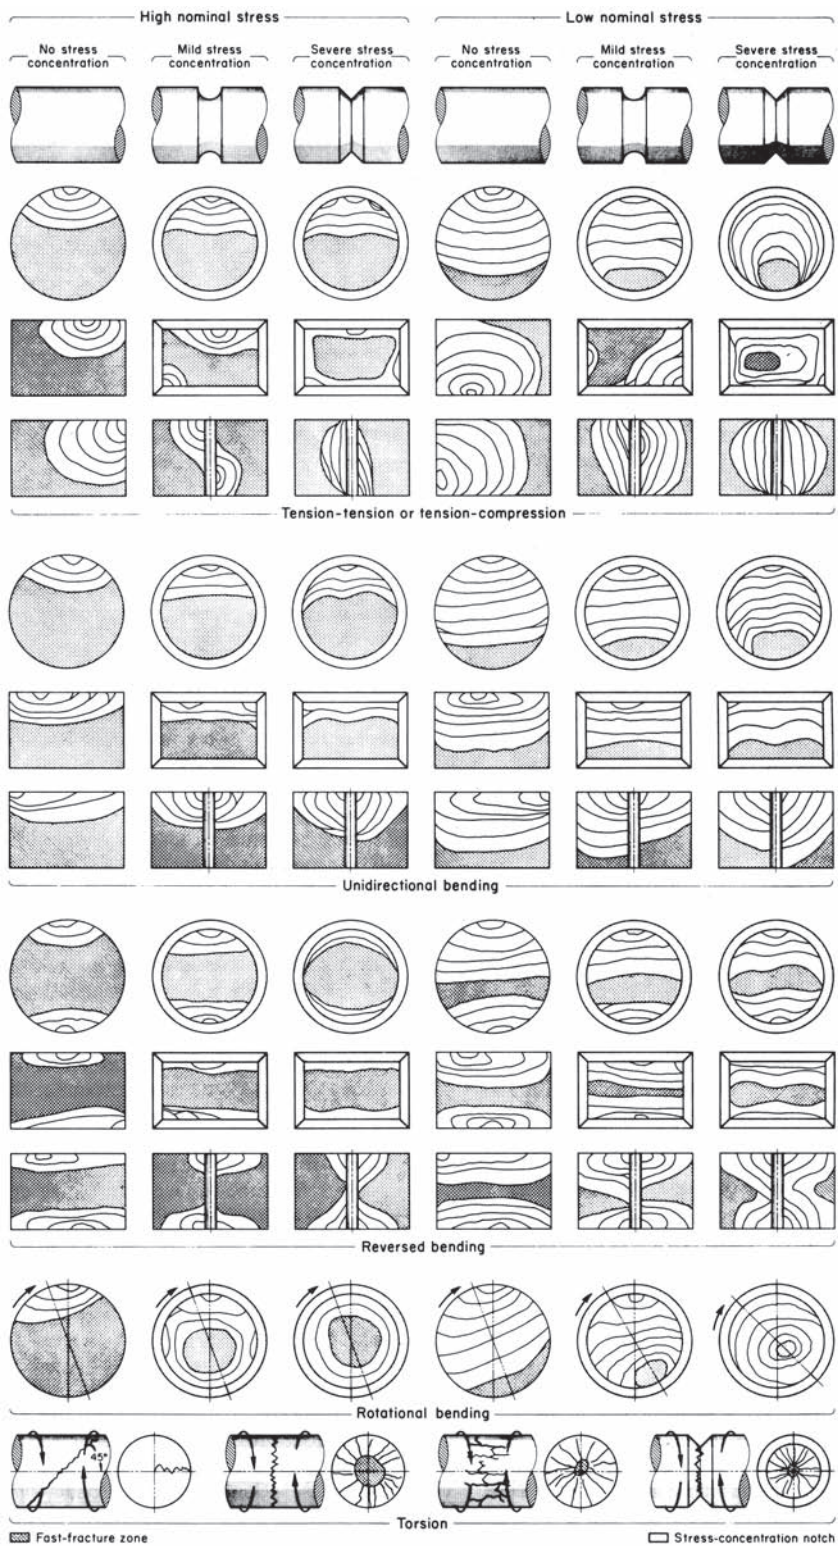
Schematic illustration of simple fatigue failures
